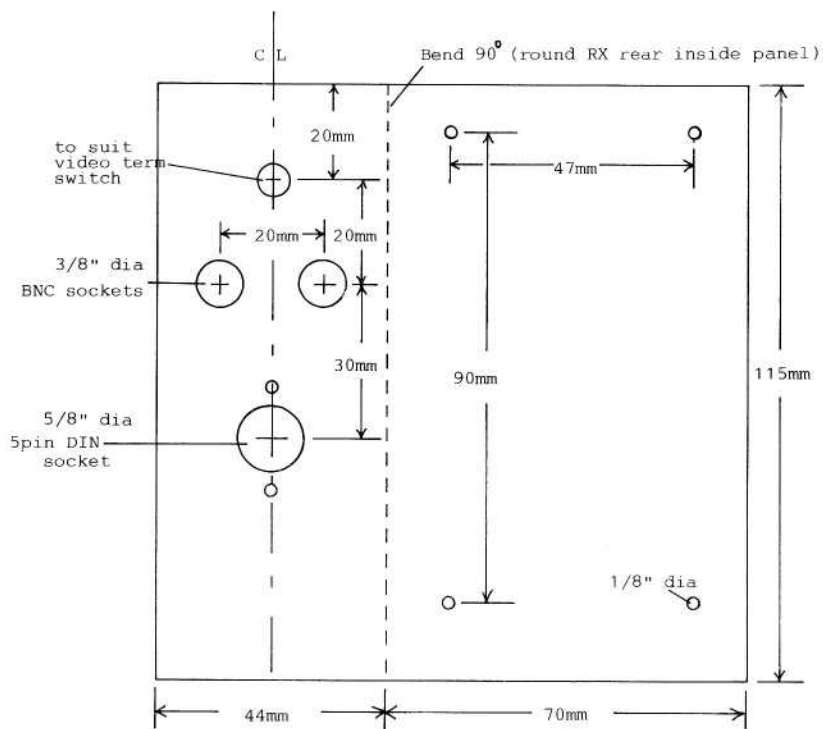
REAR PANEL AND PCB SUPPORT BRACKET.
